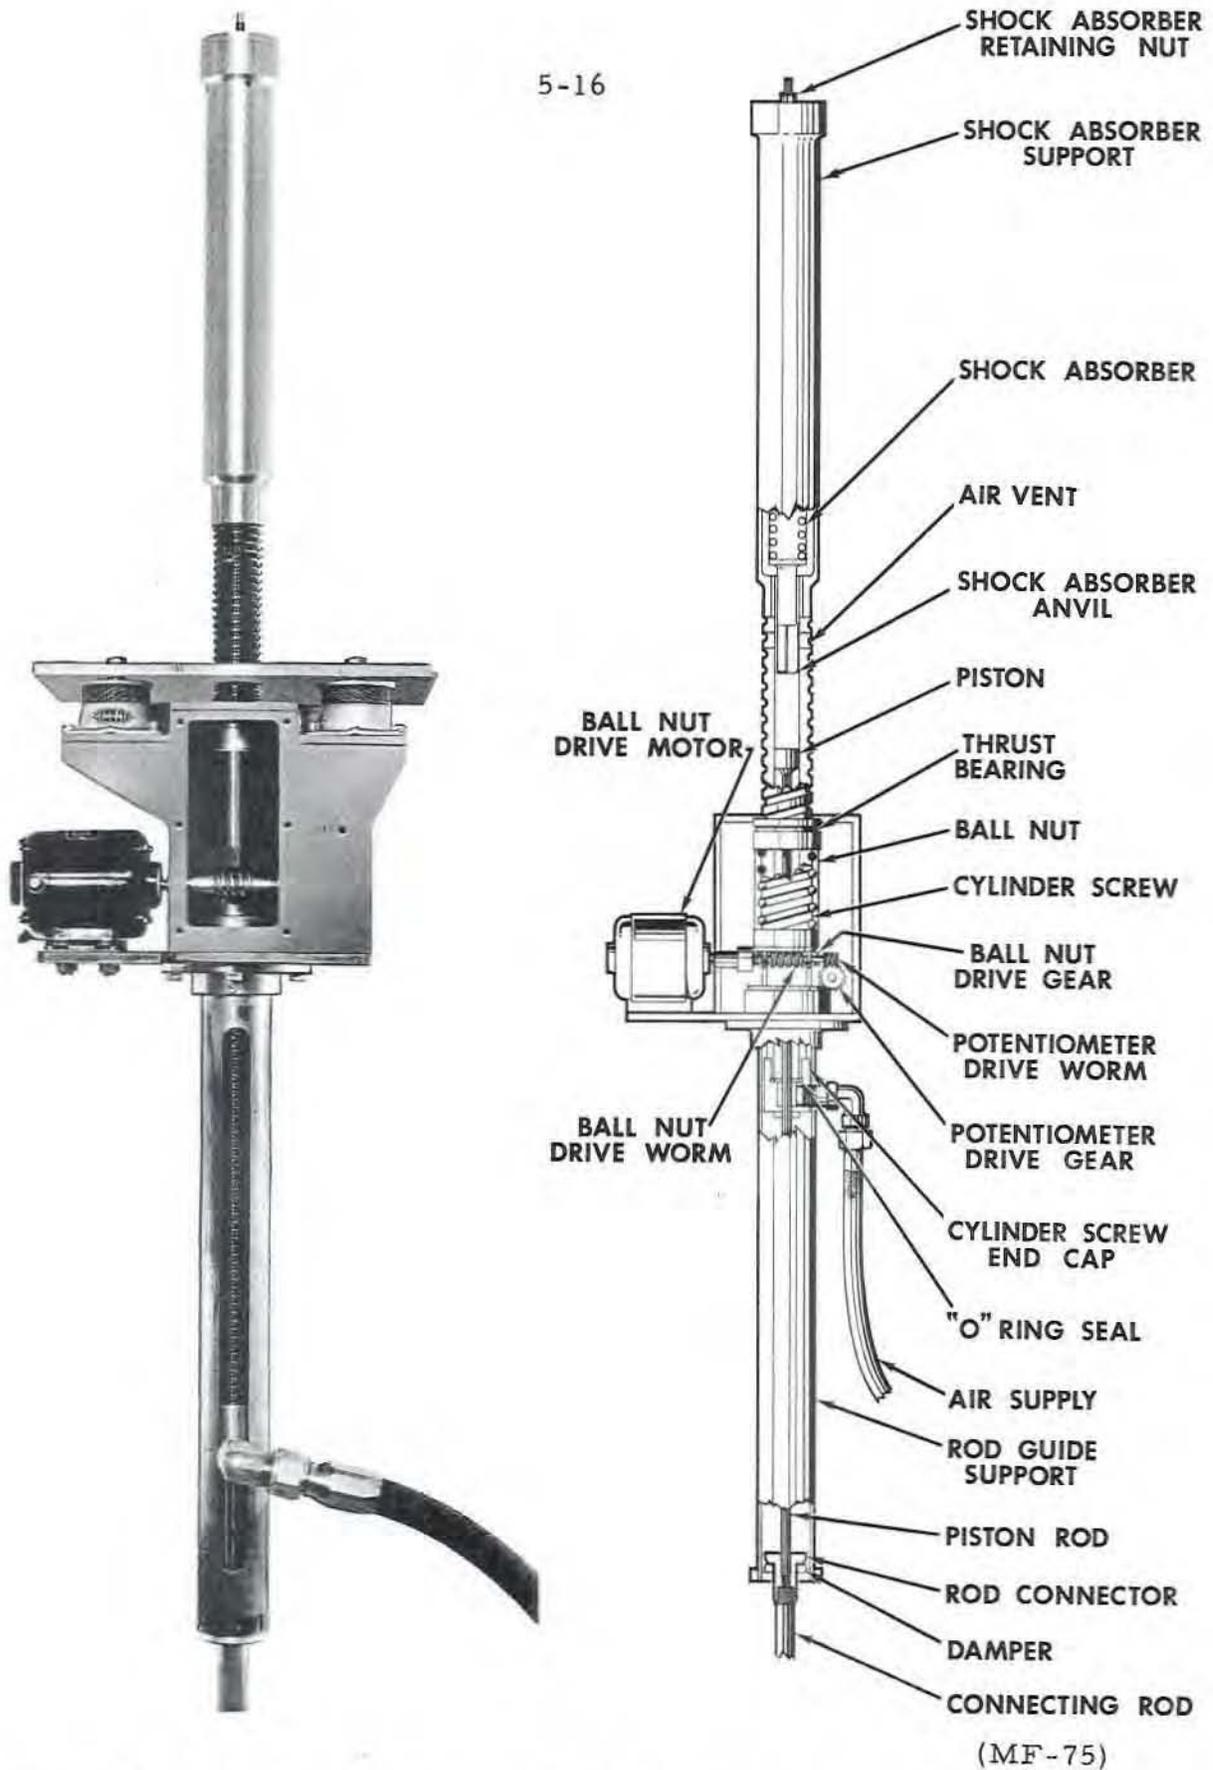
Pneumatic-electromechanical transient-rod drive
